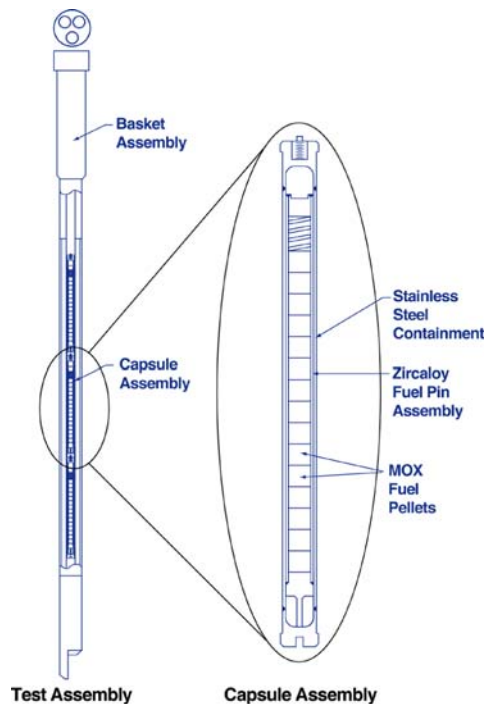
The test assembly permitted simultaneous irradiation of up to nine MOX test capsules.
